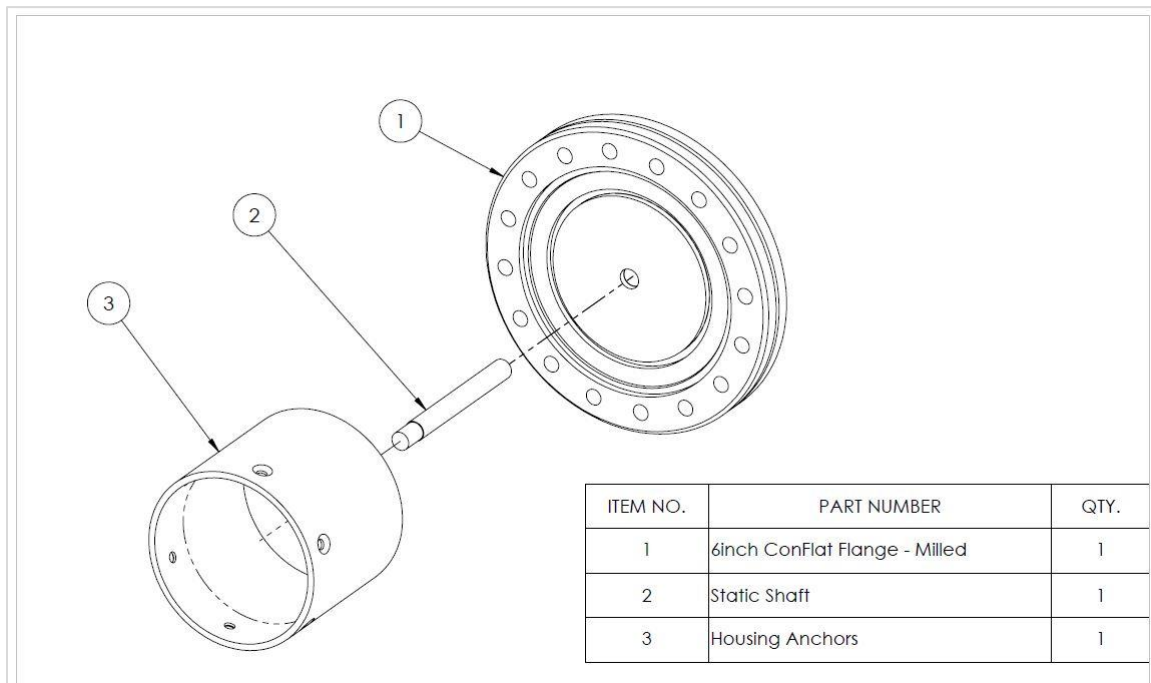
Welding Sub-Assembly with the pump housing anchor and static shaft
